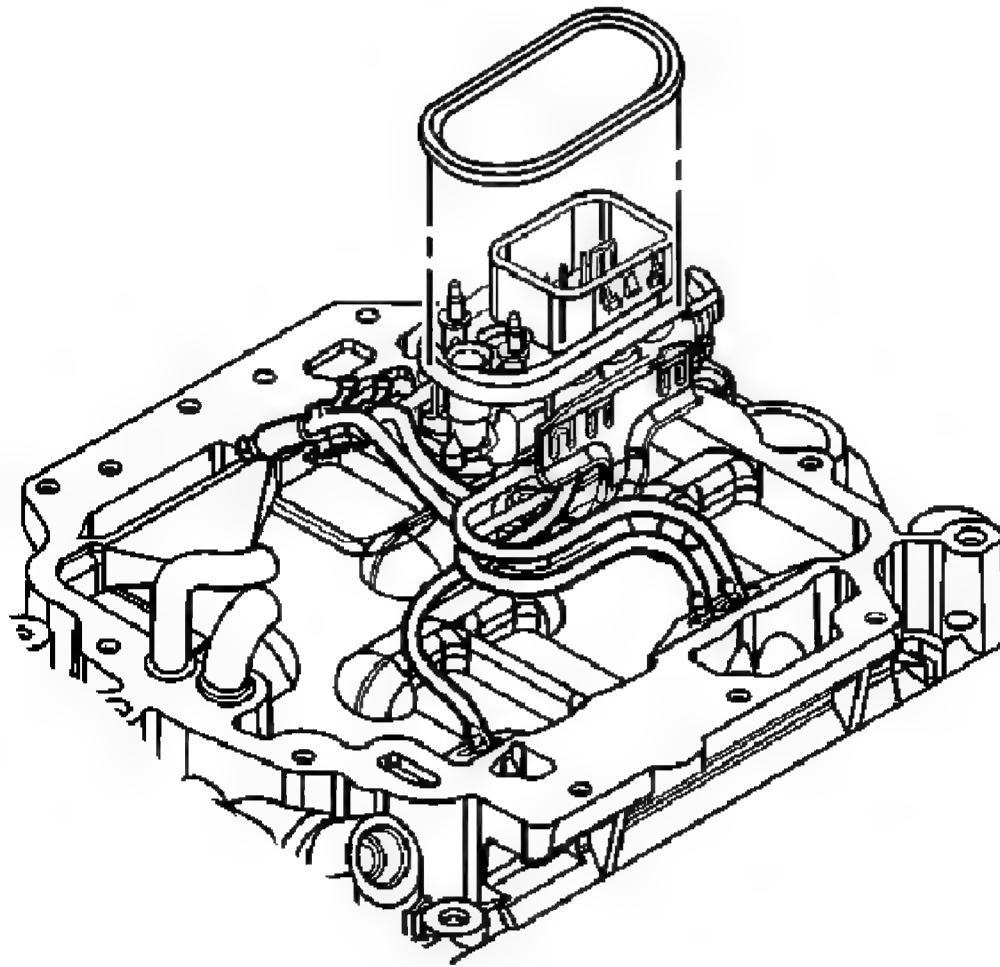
Locating Seal For Fuel Meter Body Assembly
